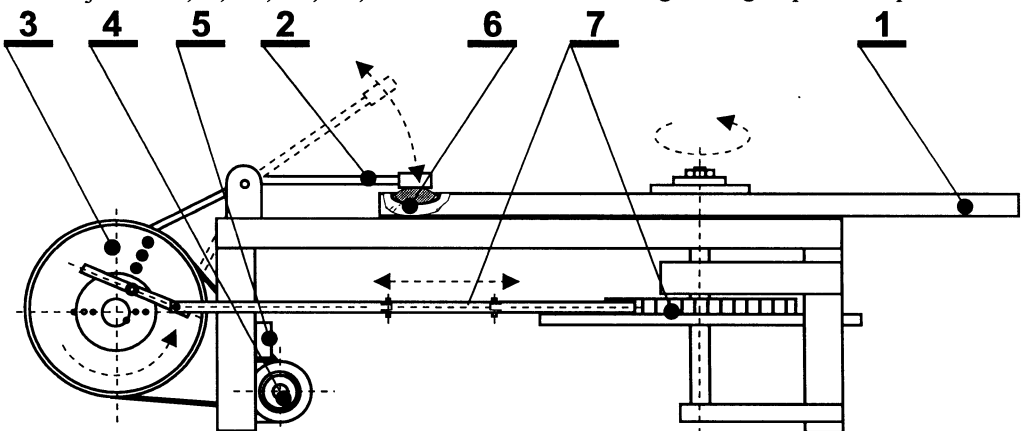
Diagram of the impact apparatus: 1-rotating disk, 2-beater ram, 3-crank lever mechanism, 4-motor, 5-grain, 6-spring latch mechanism.
